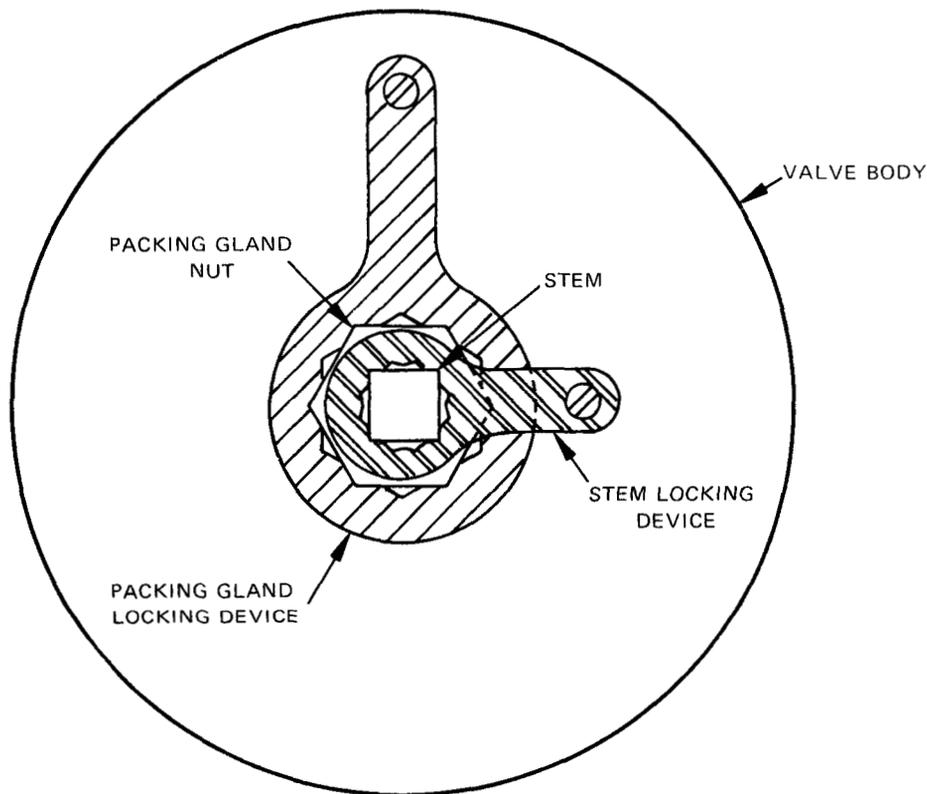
Valve Stem and Packing Gland Locking Devices.
